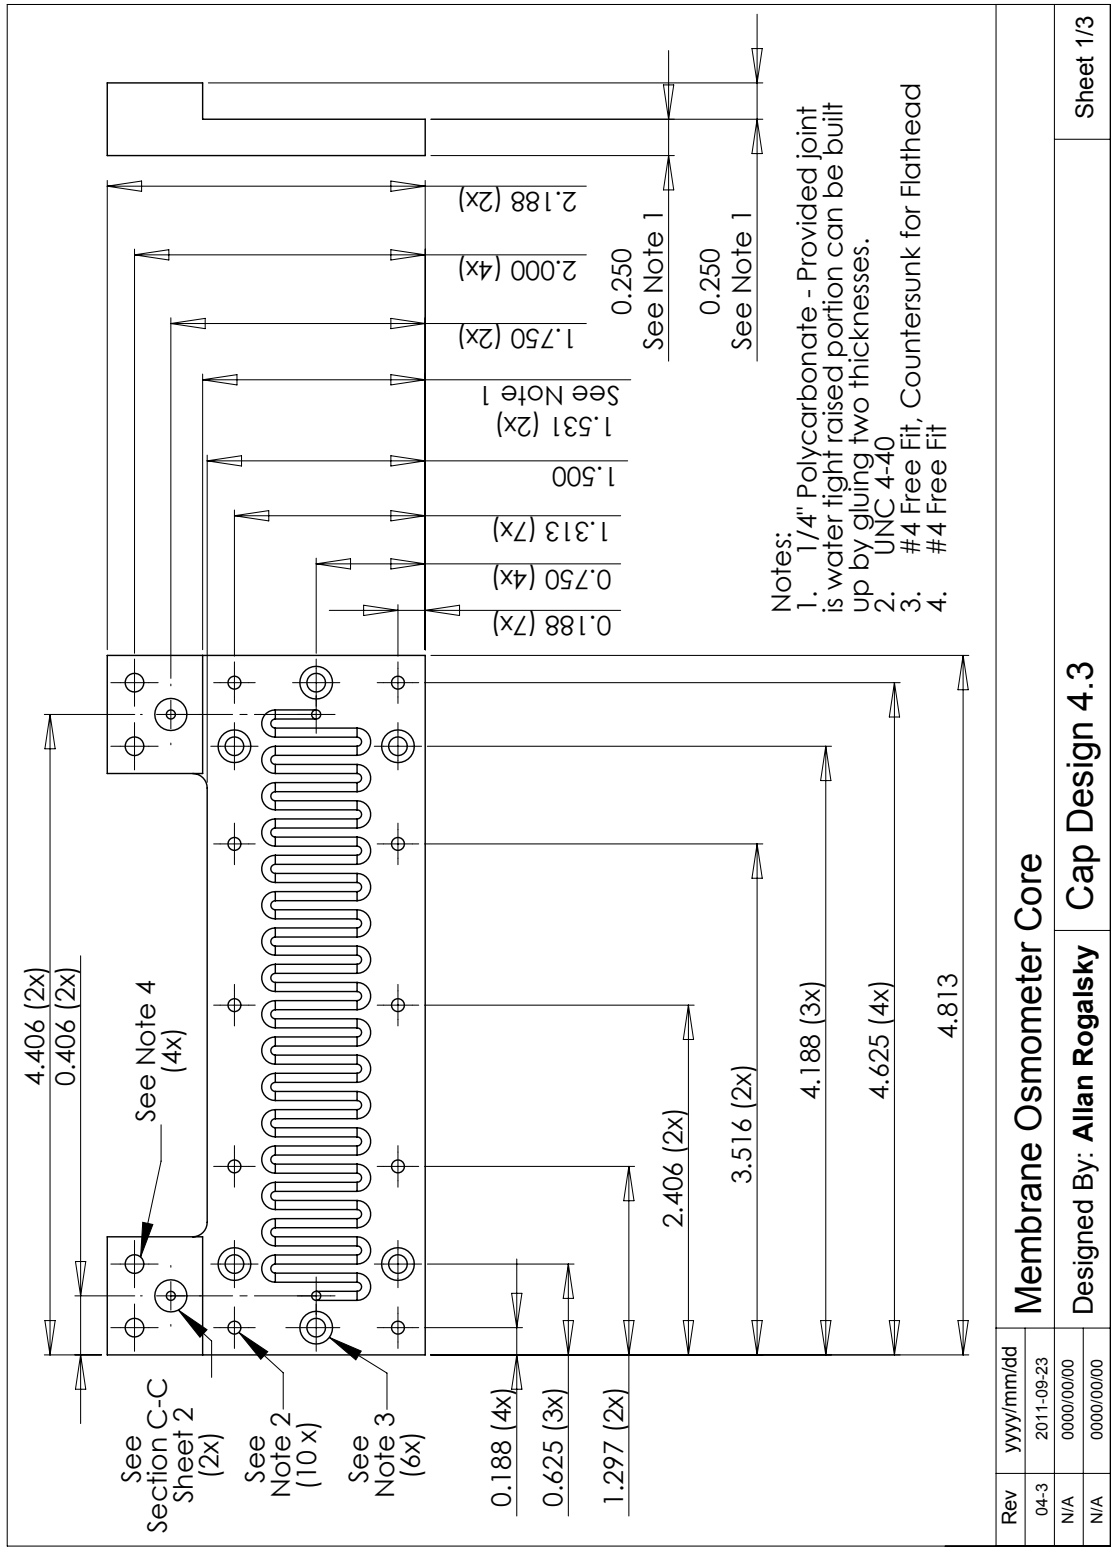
Osmometer Top Level 4.0 / Core Assembly / Cap / Sheet 1
